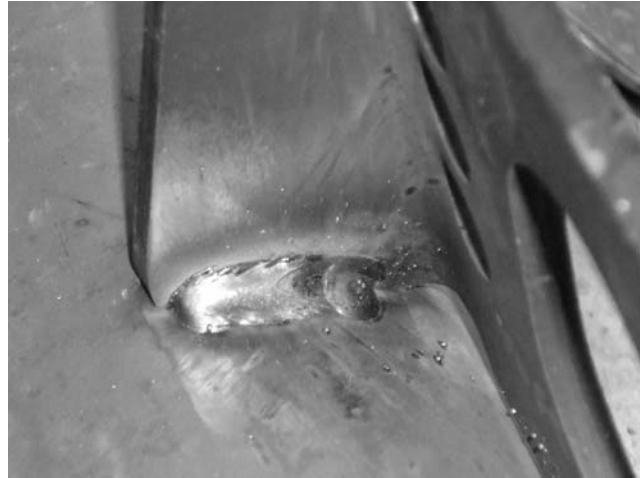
Final air chamber bracket weld (inside of bracket)
